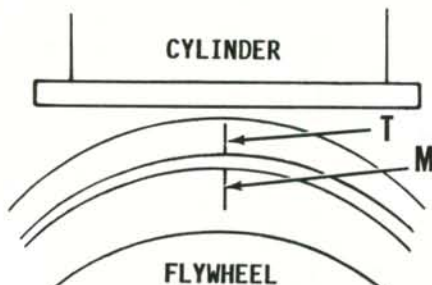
Mark (M) on flywheel represents 18 degrees BTDC. When engine is operated at 6000 rpm, flywheel mark (M) should align with crankcase mark (T).
